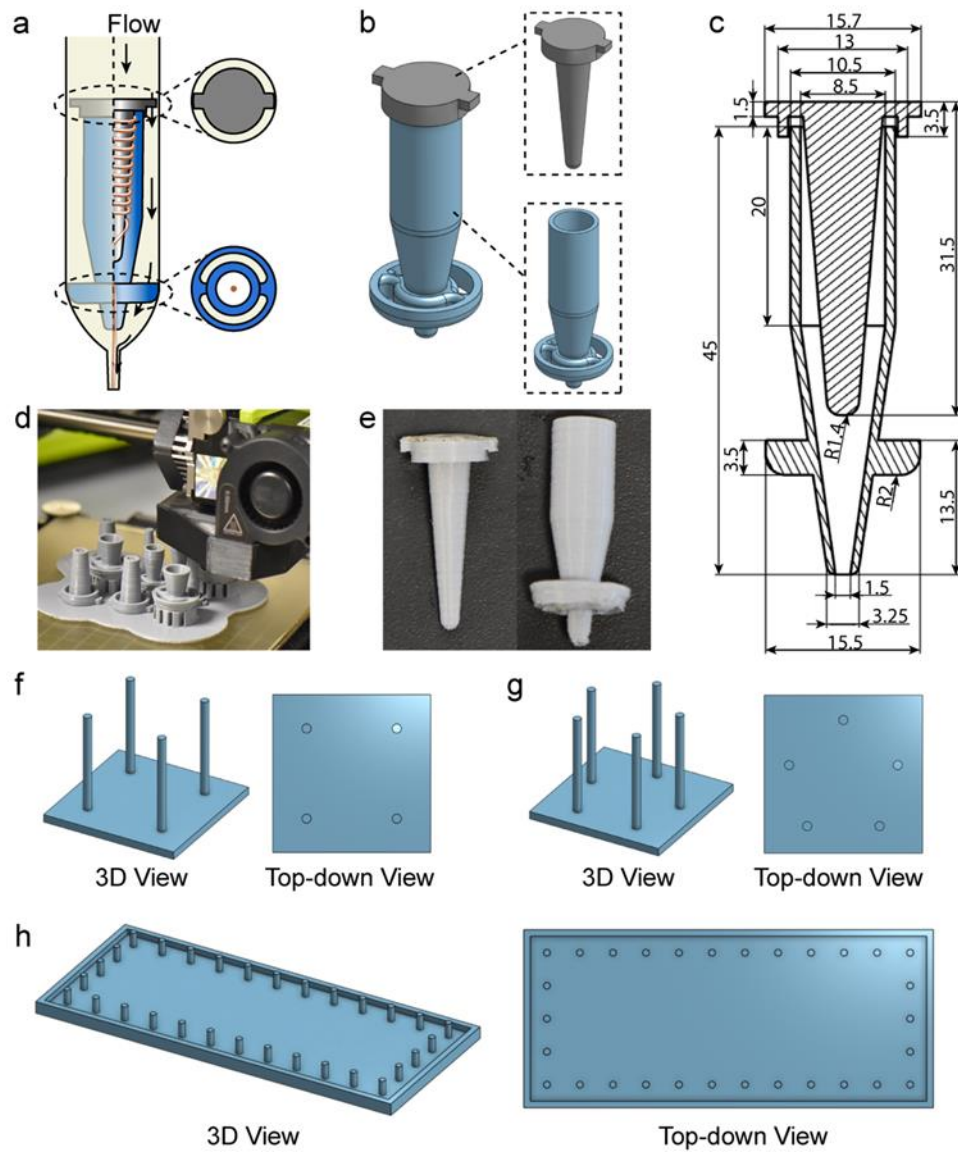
Design of Customized Manifolds and Printing Substrates. (a) Schematic of the mechanism of coaxial fiber microextrusion with customized manifolds. (b) CAD model of the two-part customized manifolds. (c) Design drawing of the assembled customized manifolds. (d) Photographs of the fabrication process and (e) the finished customized manifolds. CAD design of customized substrates with anchor pins for fabricating (f) cuboid-, (g) star-shaped 3D structures, and (h) fiber-based sensing pads.
